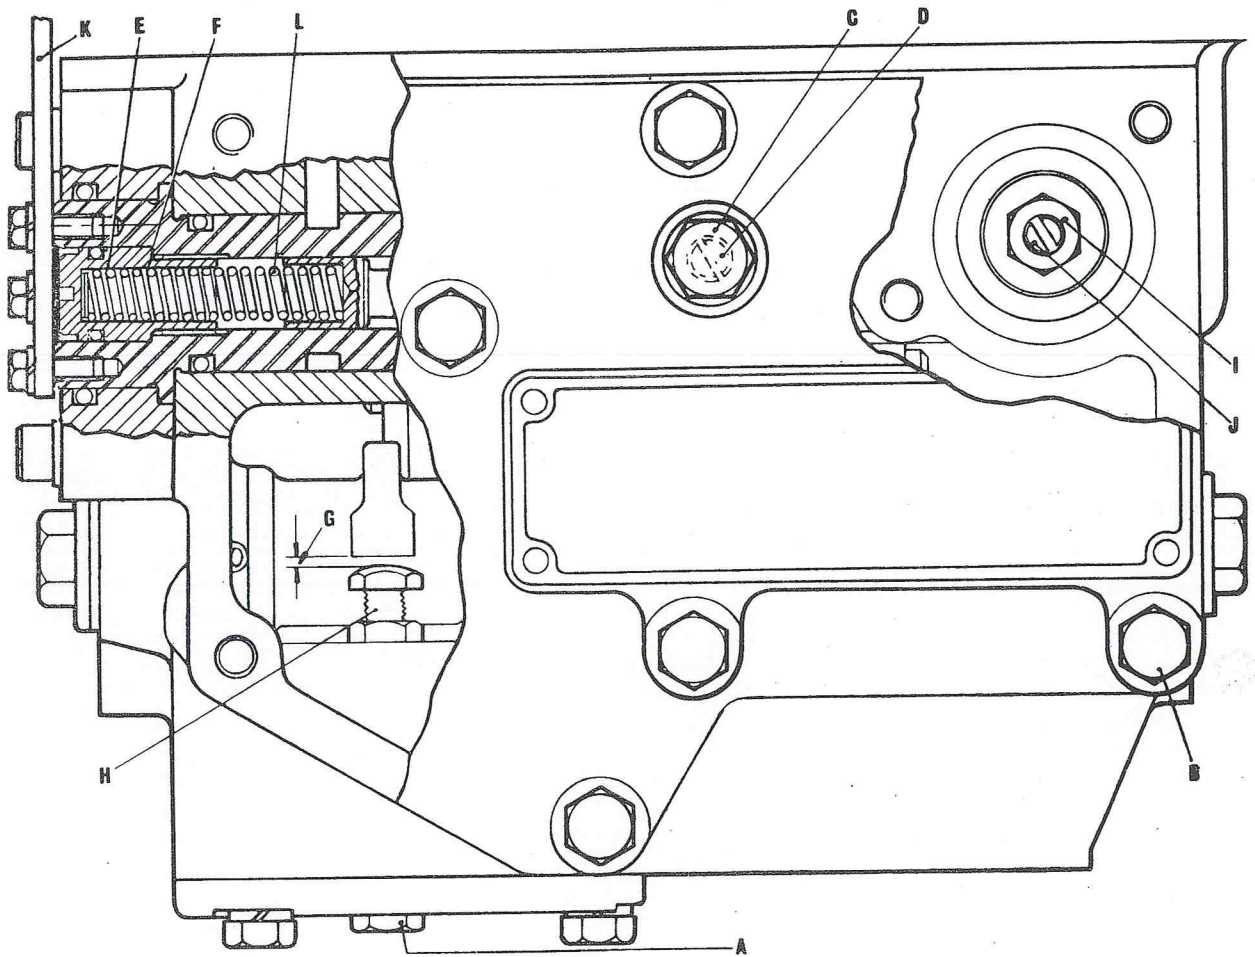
LISTER REVERSE GEAR—Hydraulic Operated.
